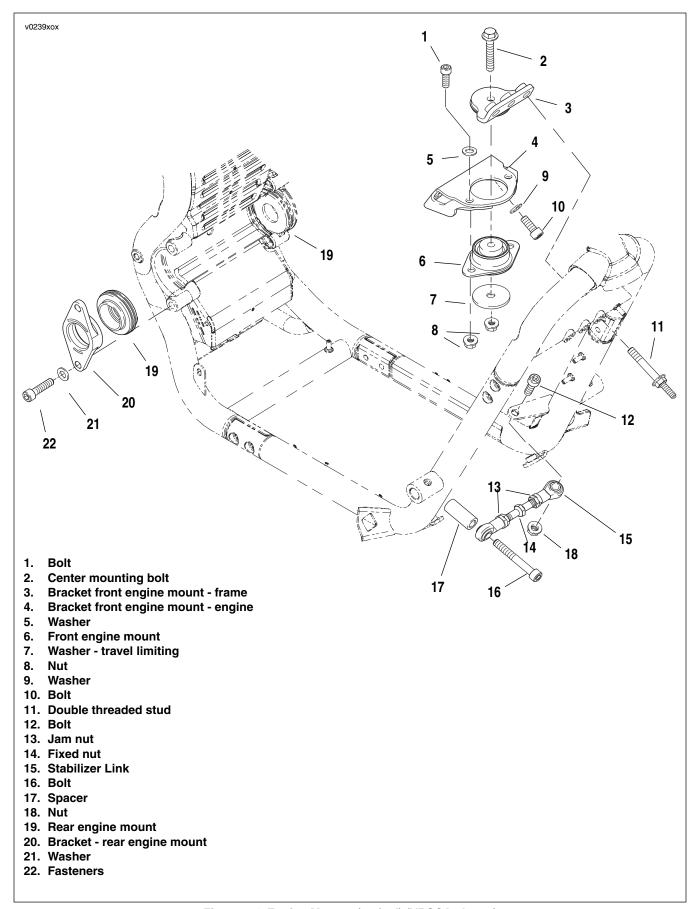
Engine Mounts (typical) (VRSCA shown)
